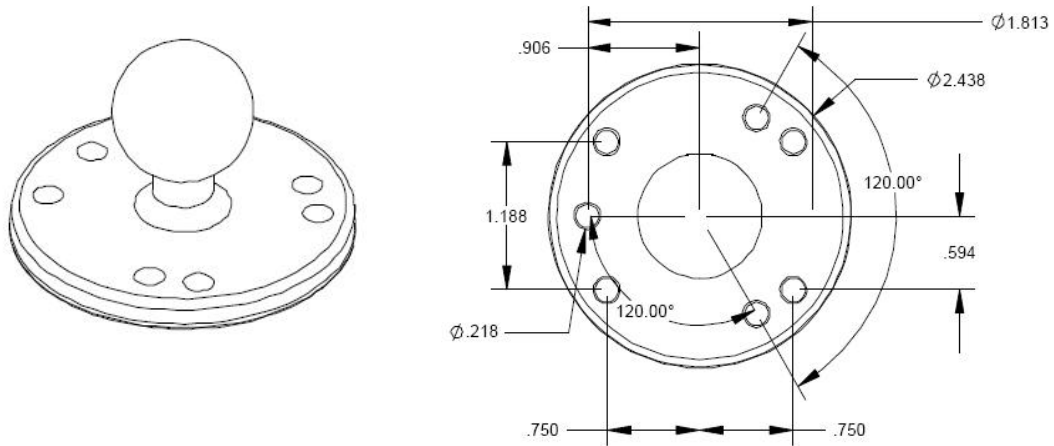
Mechanical drawings and dimensions of the panel mount Monitor 6.5C
